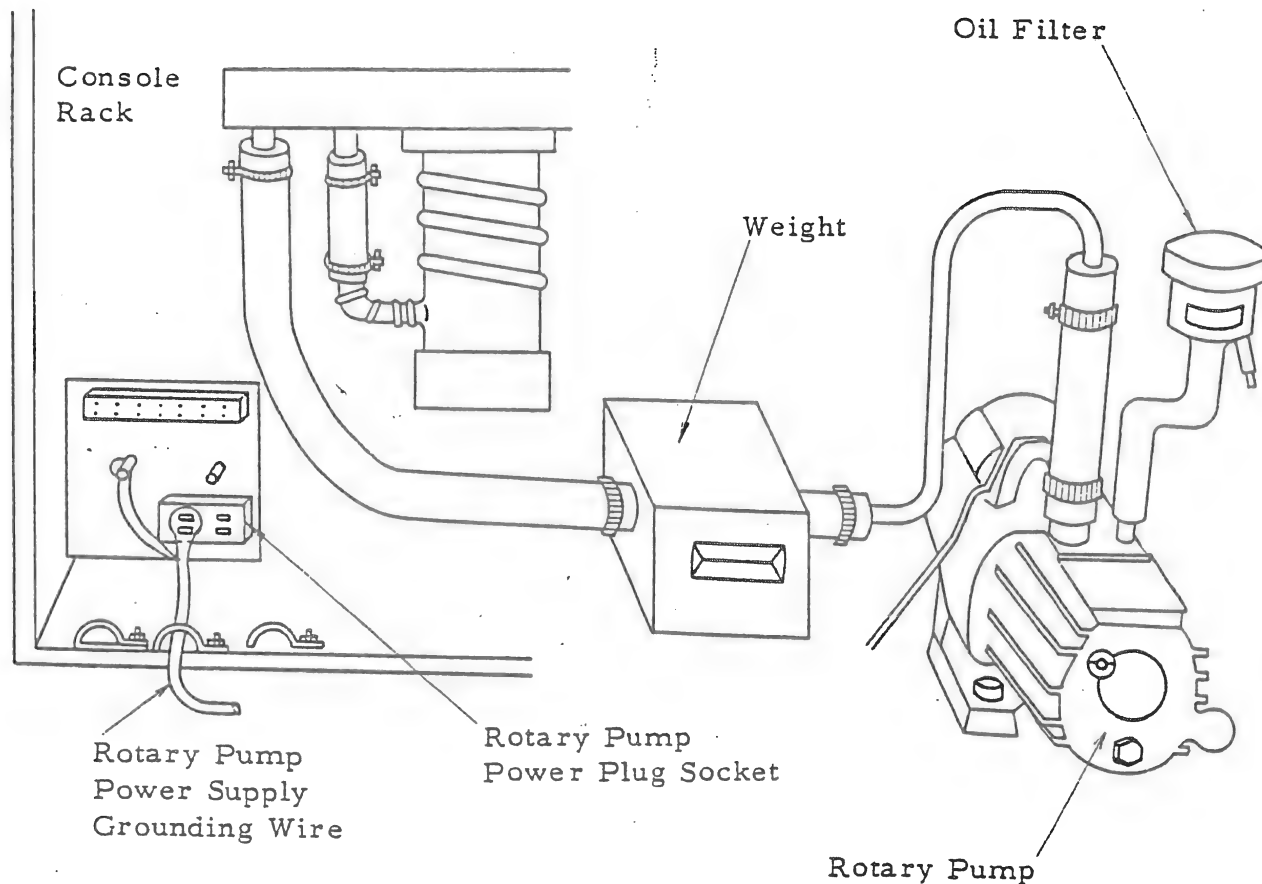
Assembly of Rotary Pump and Evacuating Pipe
